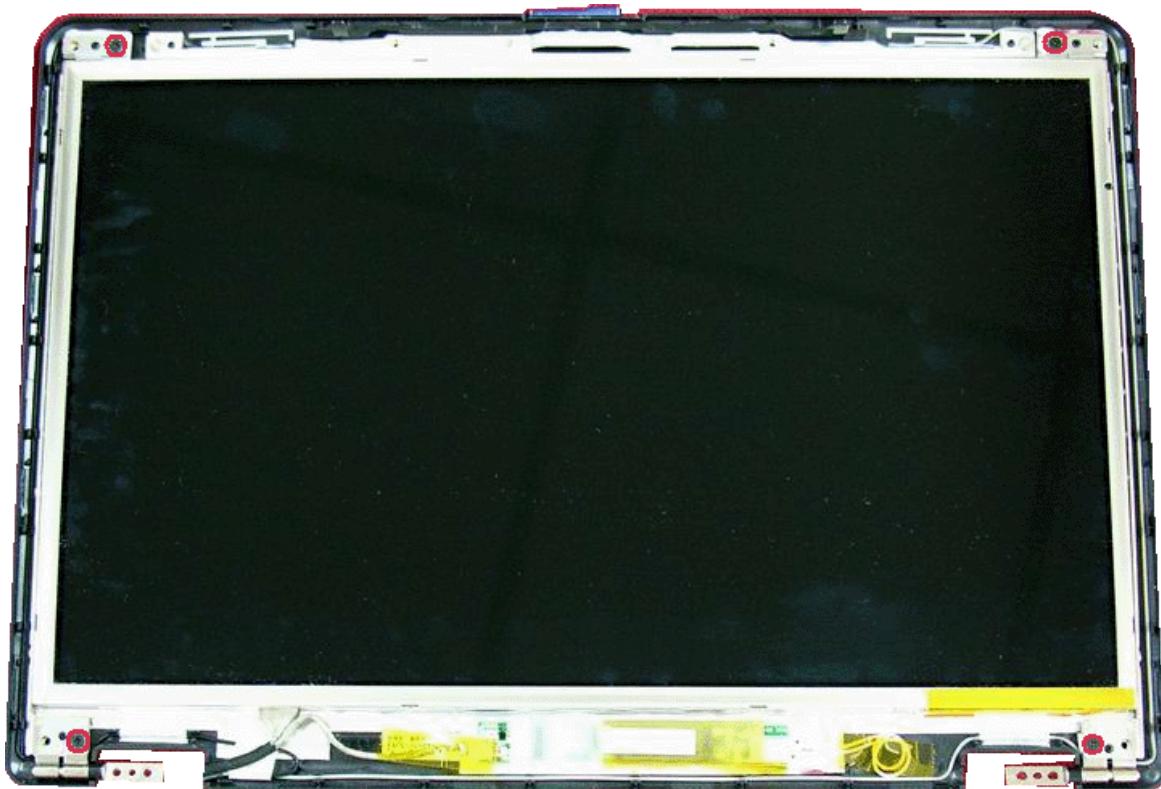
Removing the rubber covers & screws on the LCD Module
